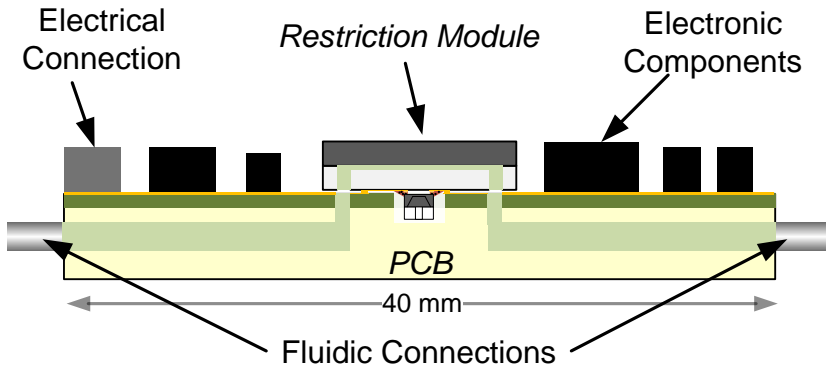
Side view sketch of the complete device. The PCB provides the macroscopic fluidic and electrical connections to the outside world.
